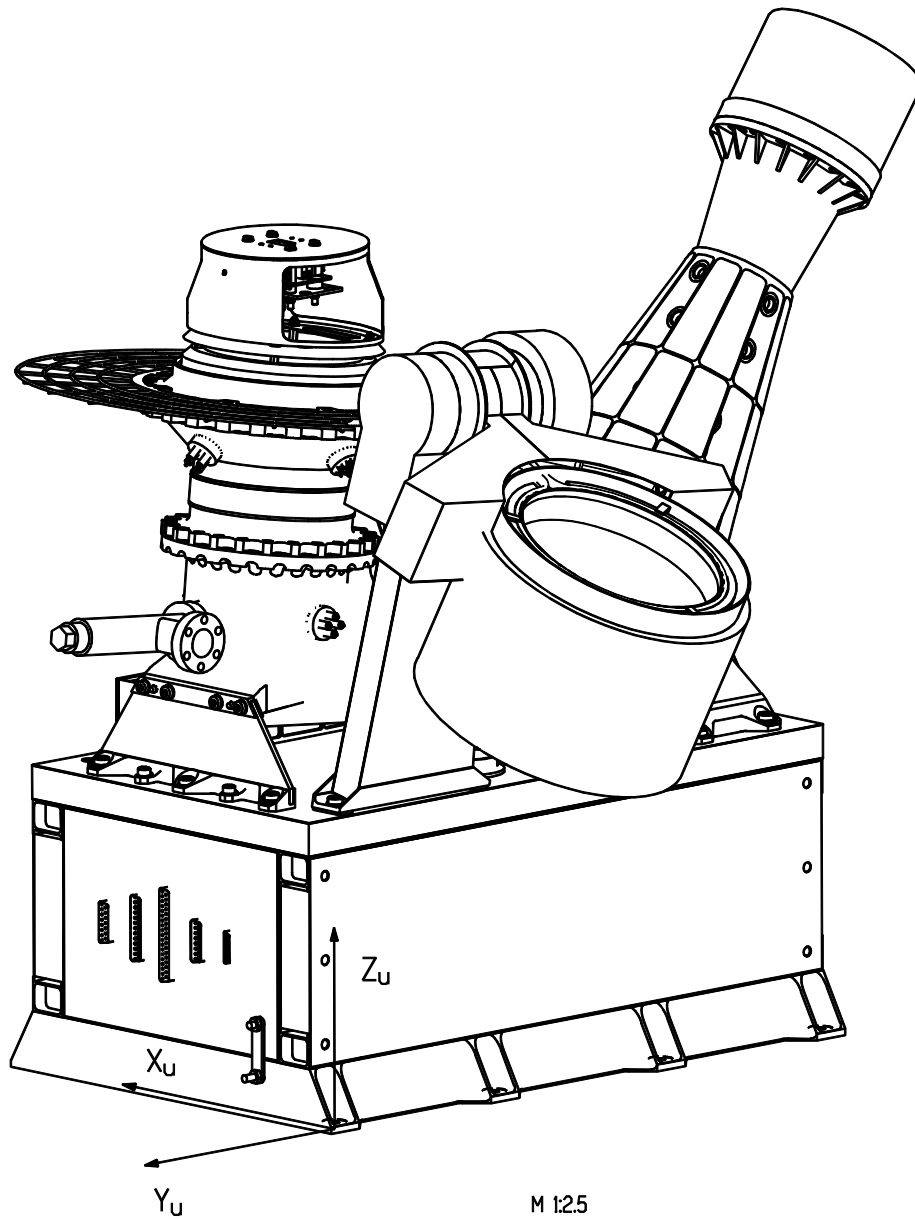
Mechanical Interface Control Drawing of DFMS
